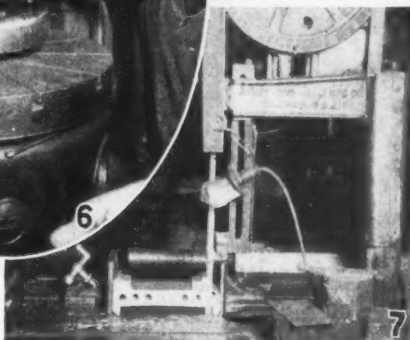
Tapers on rods and bolts can be turned with this turret lathe and attachment. Fig. 6—Polishing a cylinder head, using an air motor and boring mill. Fig. 7—Journal gages are shaped up in the block, and are then sawed off in the band saw.
